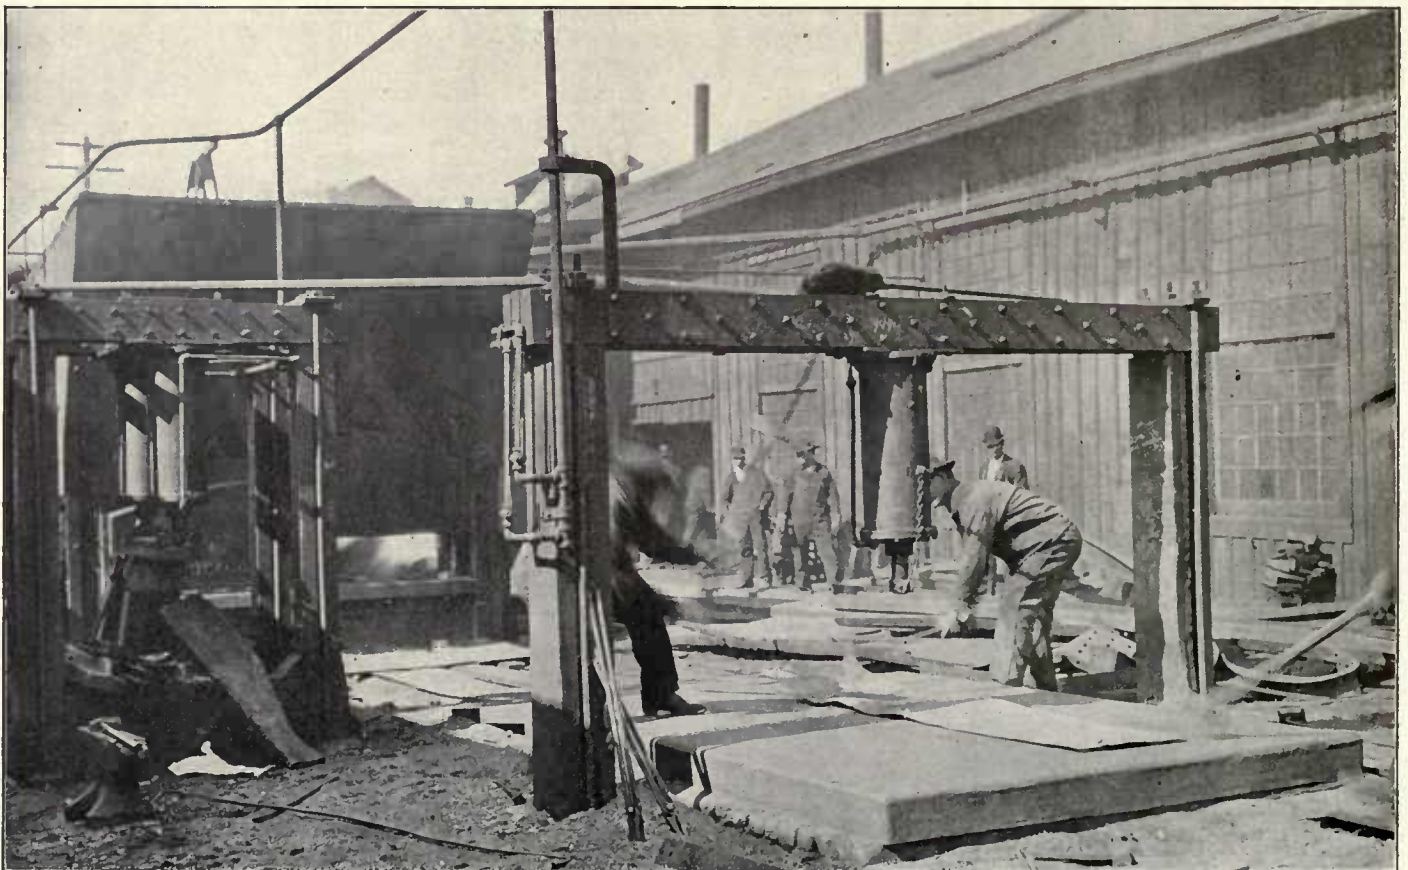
Furnace and Face Plate for Heating and Straightening Large Steel Car Parts.
